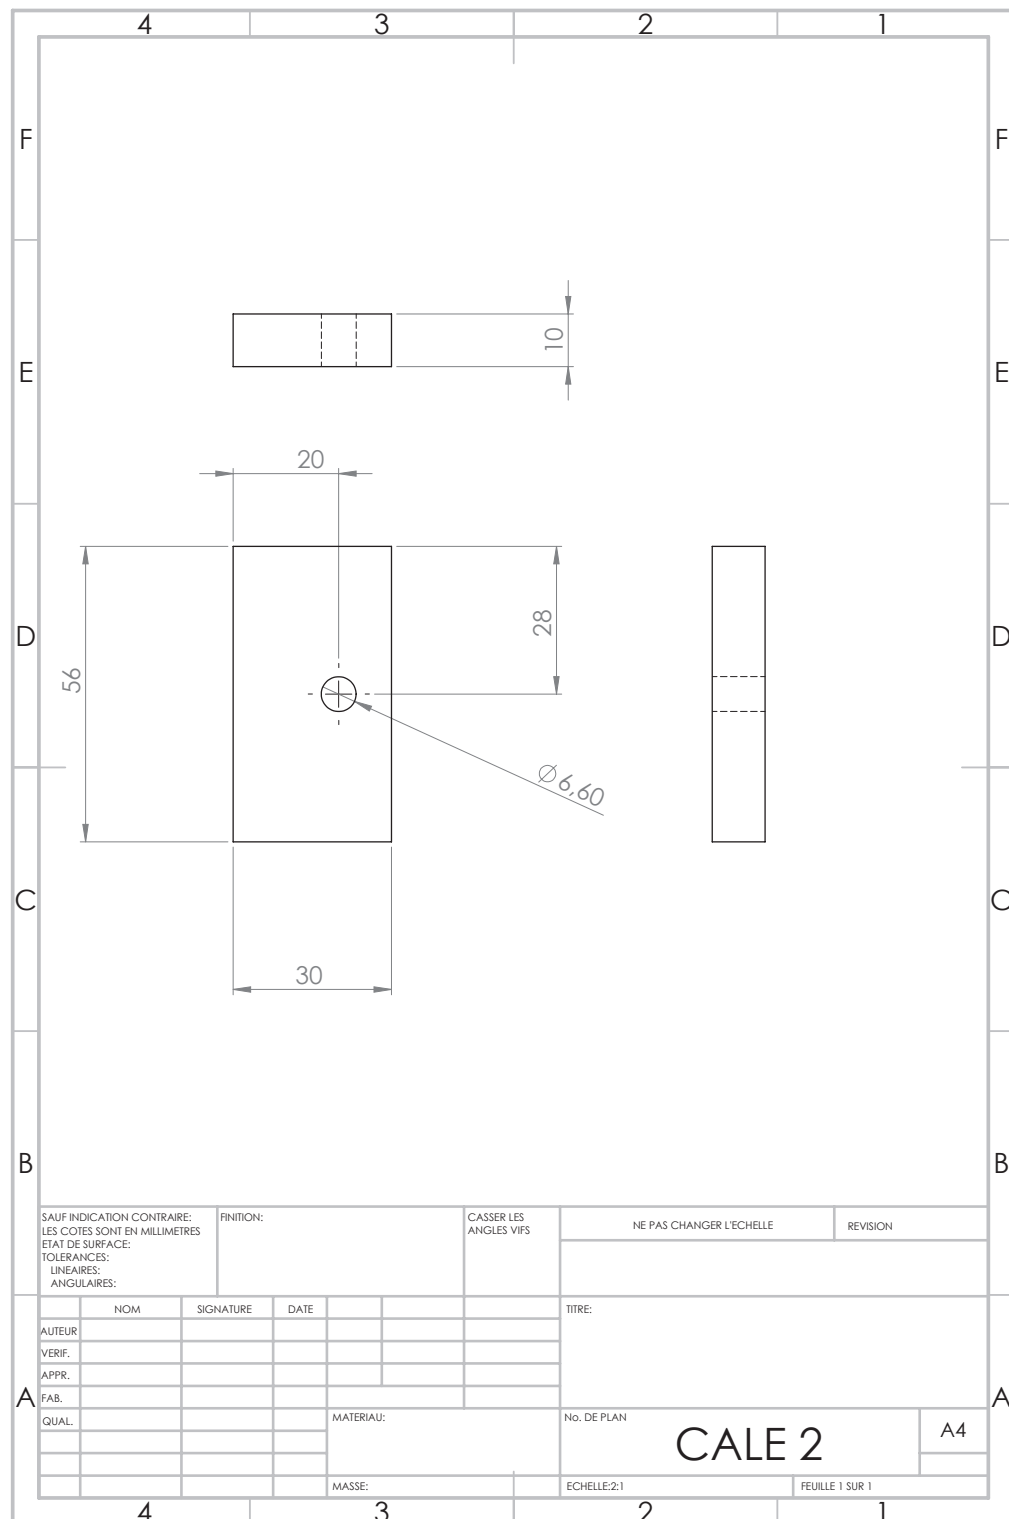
Dimensioned drawing of the wedge I (5). Provided by LAUM mechanical workshop.
